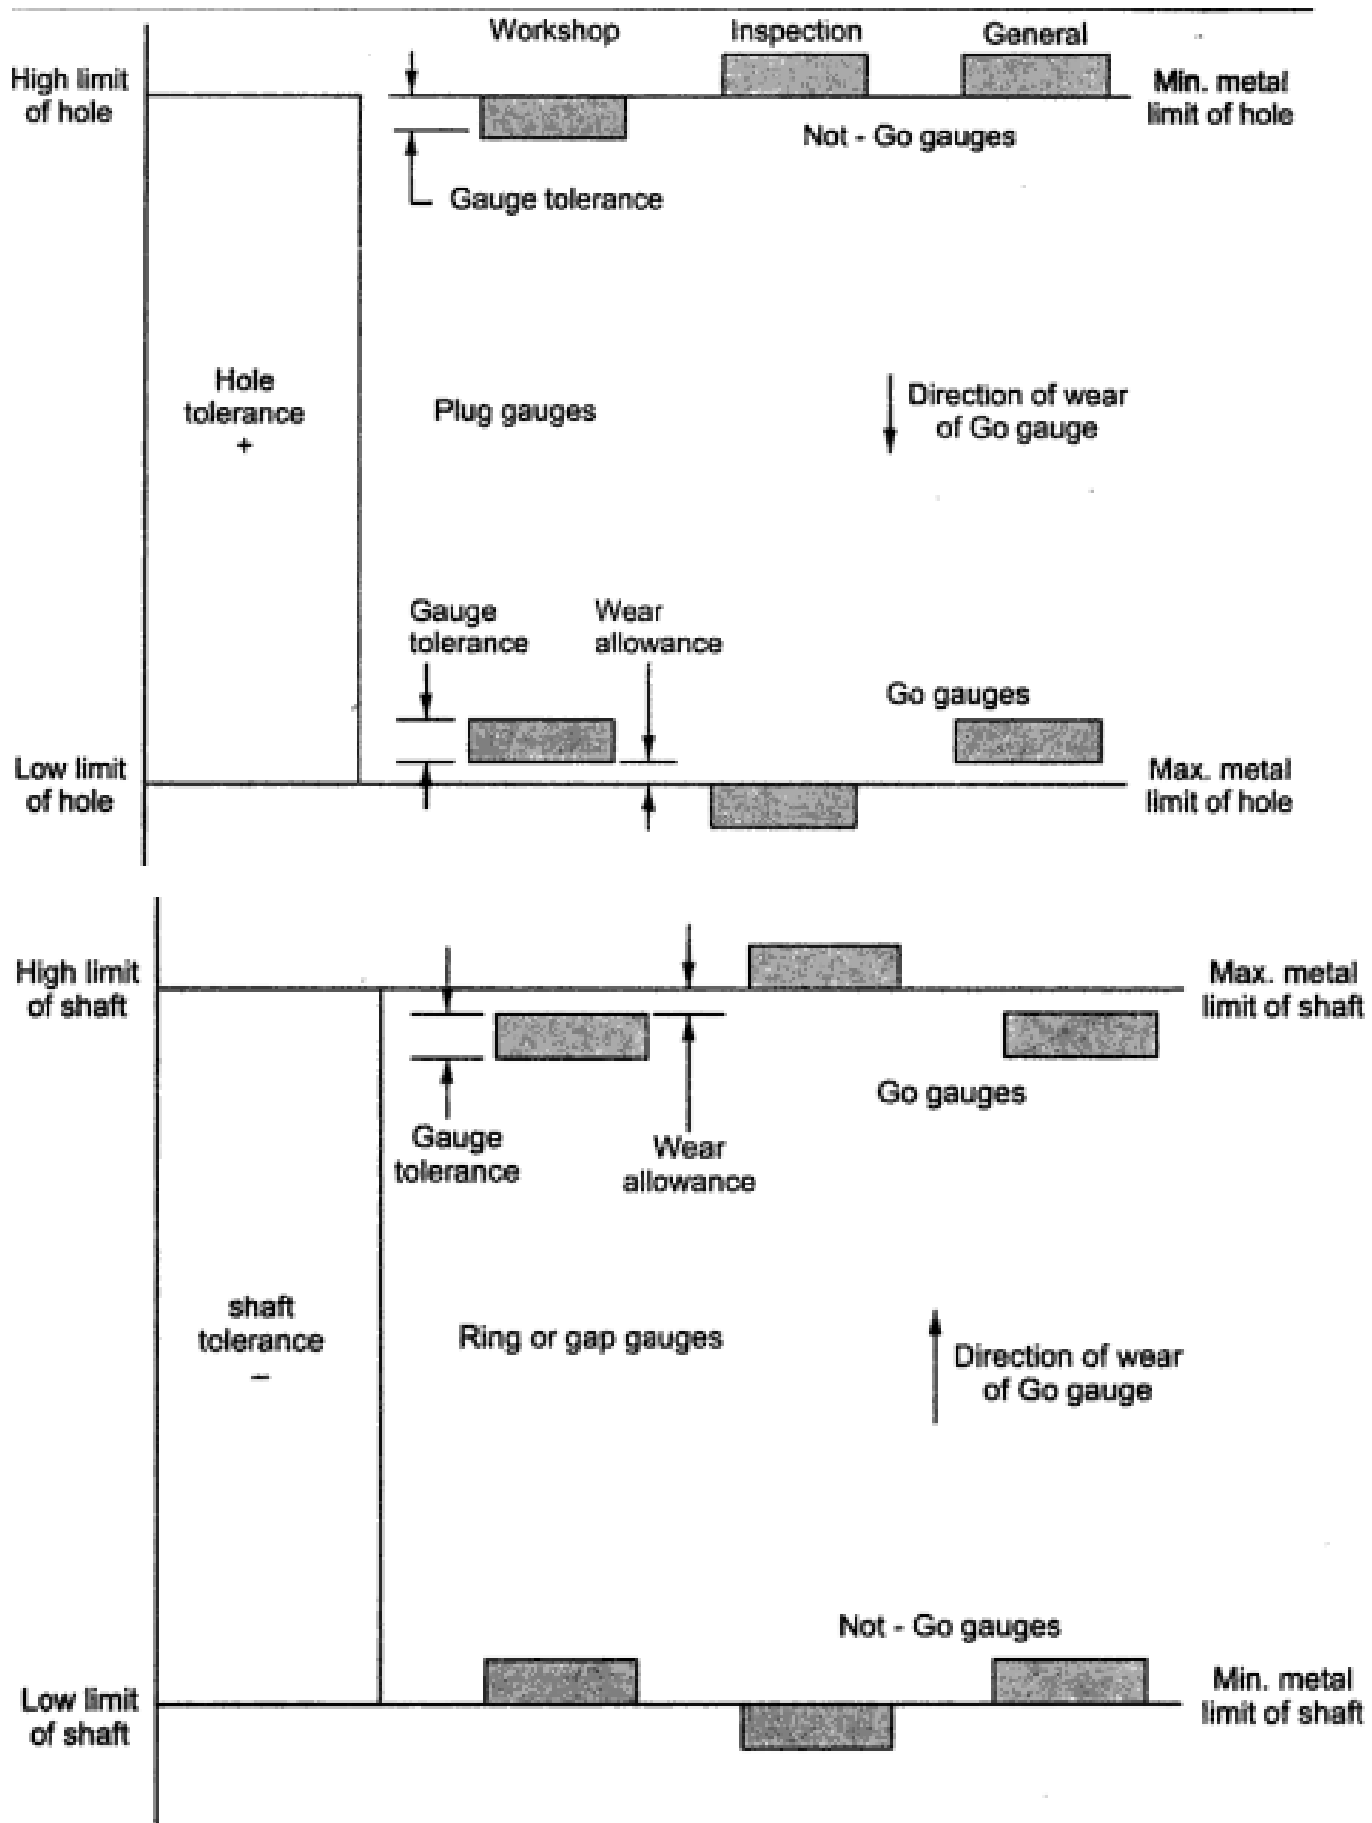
Gauge Tolerance & Wear Allowance
